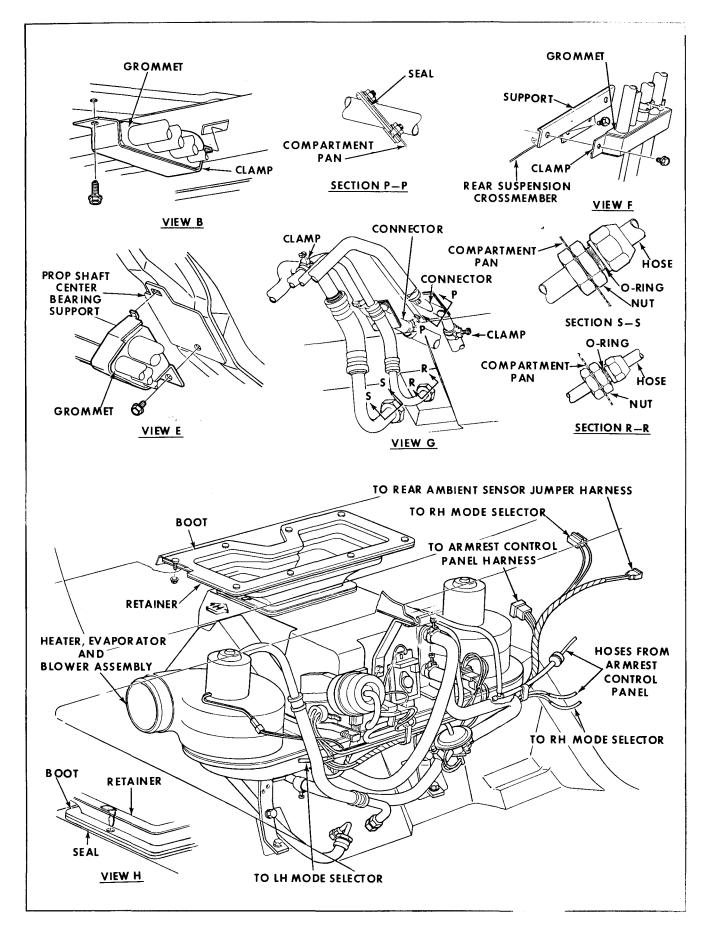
Rear Heater, Evaporator and Blower Assembly
